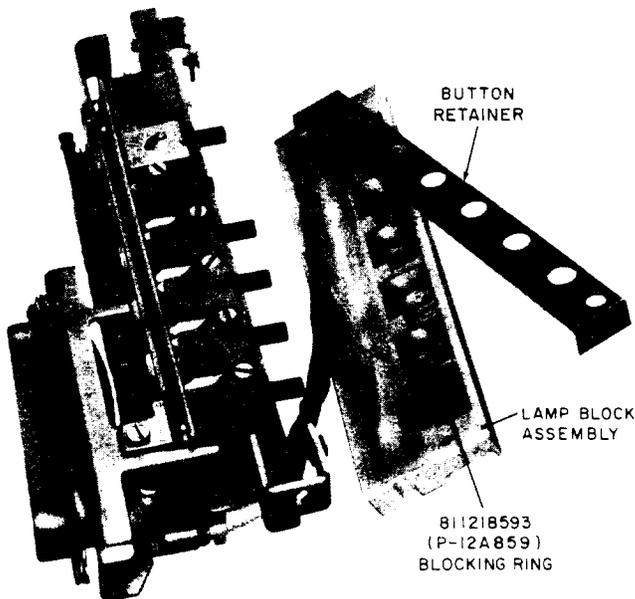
Blocking Ring Installed in 590 or 650 Series Keys
